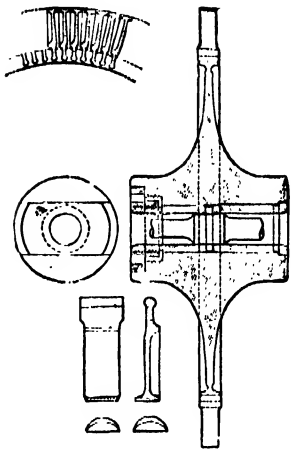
Details of De Laval Wheel and Flexible Shaft
